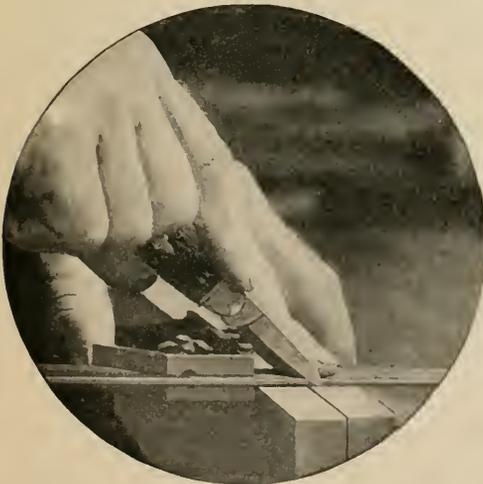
Squaring the edges of two boards to locate the position for boring dowel holes.
